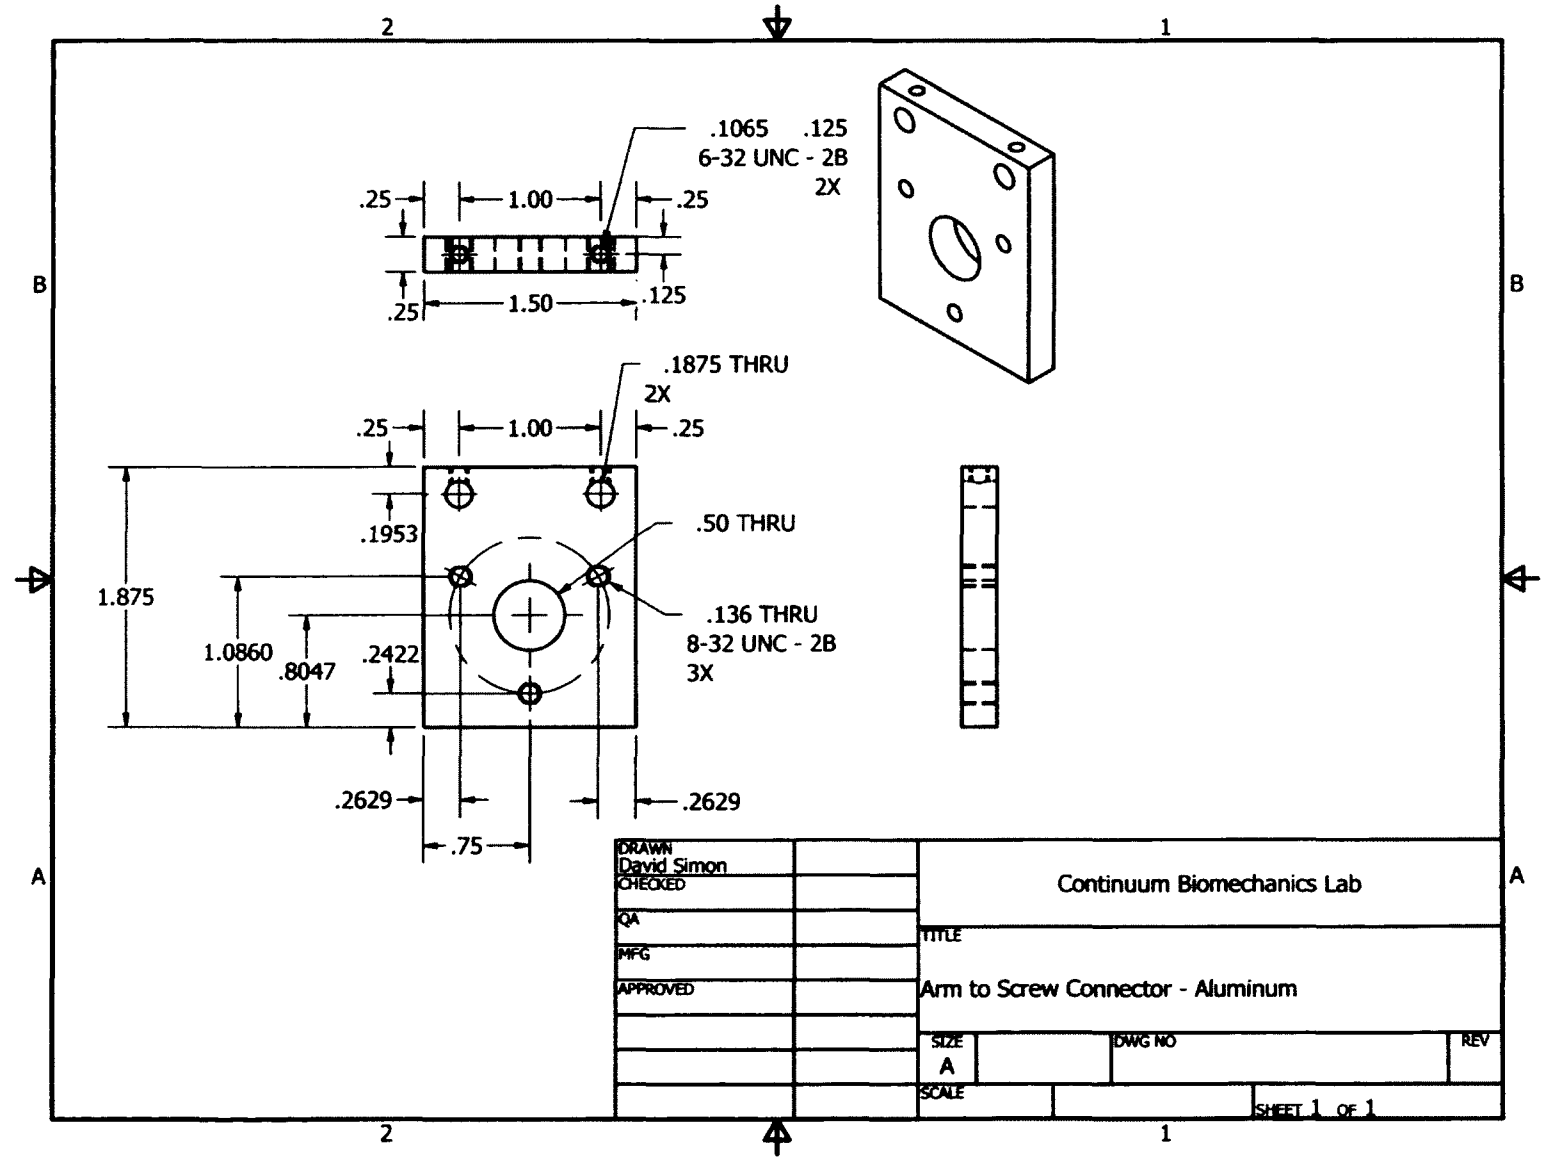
Loading arm to linear screw connector plate technical drawing. Units are in inches.
